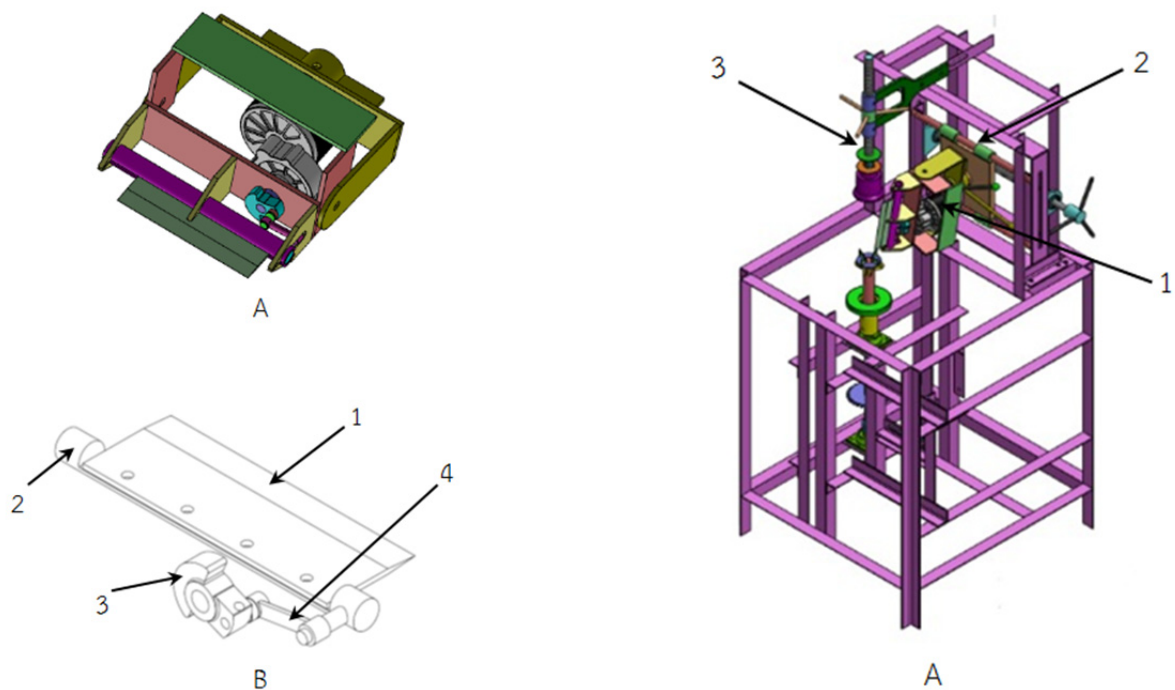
A: Reciprocating knife, B: Reciprocating machine system (1) Knife, (2) Sliding shaft, (3) crank, (4) swing arm.
